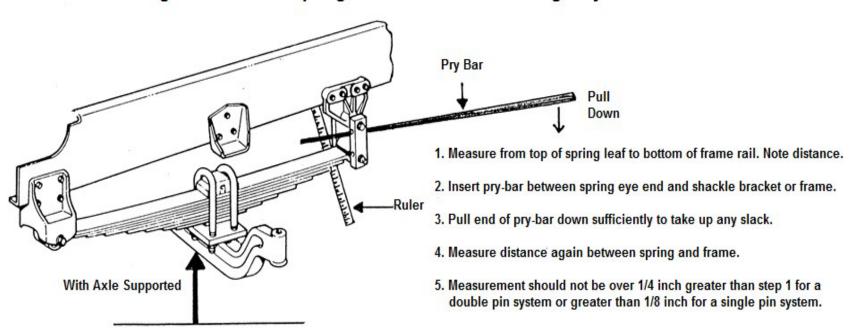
Front Spring Shackle Pin and Bushing Play Check
